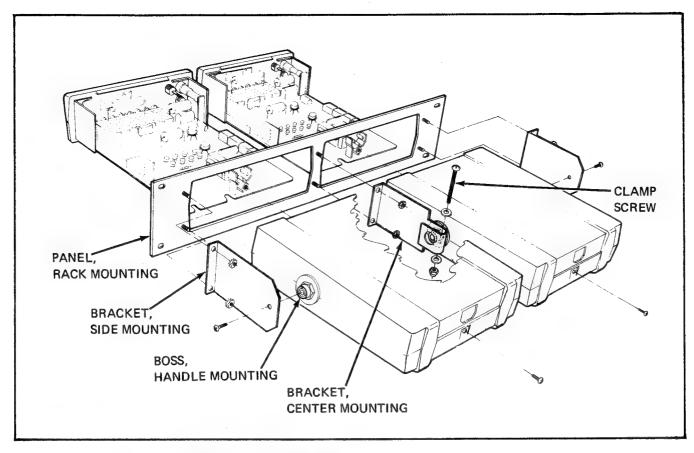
RACK MOUNTING KIT, SIDE-BY-SIDE MOUNTING
